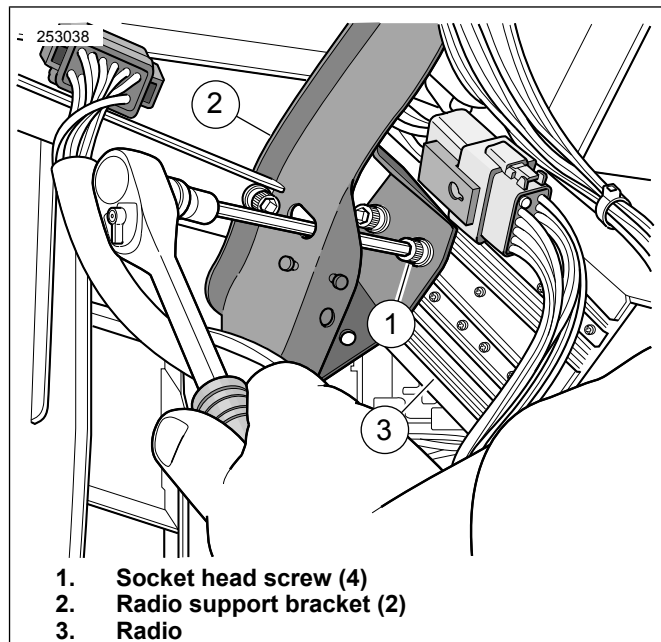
AM/ FM Radio Installation; Right (Brake) Side Shown
